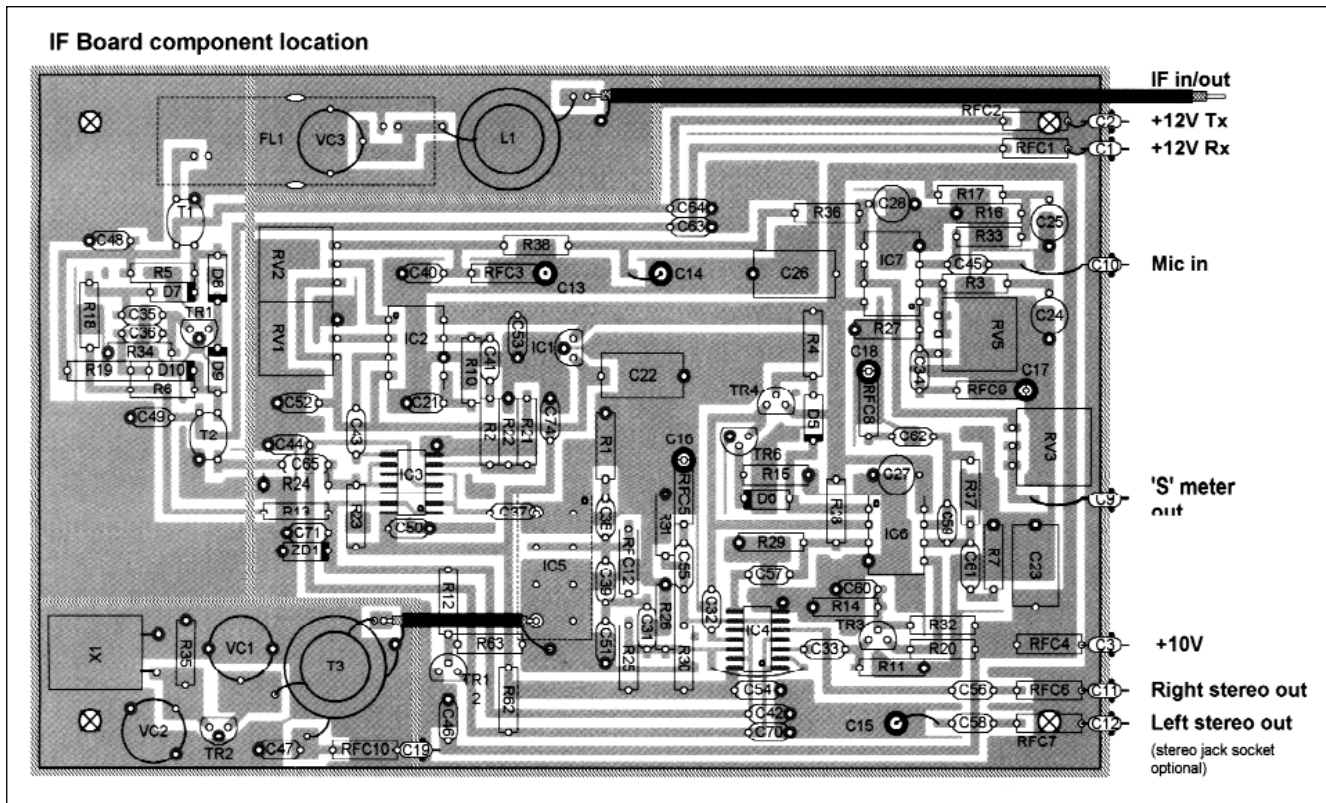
IF board PCB layout on double-sided board (see Appendix B for the PCB artwork). The reverse side is completely unetched to form a continuous ground plane and screen. All components with the exception of the crystal filter, FL1, and the SBL-1 mixer, IC5, are mounted on the track side. You may need to customise the tracking to suit your crystal filter. The 'holes' are shown on the component layout only to define the tracks should you be producing the PCB by some manual method. Only components which feed through to the back of the board require actual drilled holes and these are as defined on the tracking template. The tracking template image is mirrored (ie flipped left-to-right) for direct copying to iron-on laser film. The basic drilling size is 0.7mm - with holes for mounting, feedthroughs etc drilled larger to suit. Some internal screening partitions are made from PCB material or brass shim stock. Those
